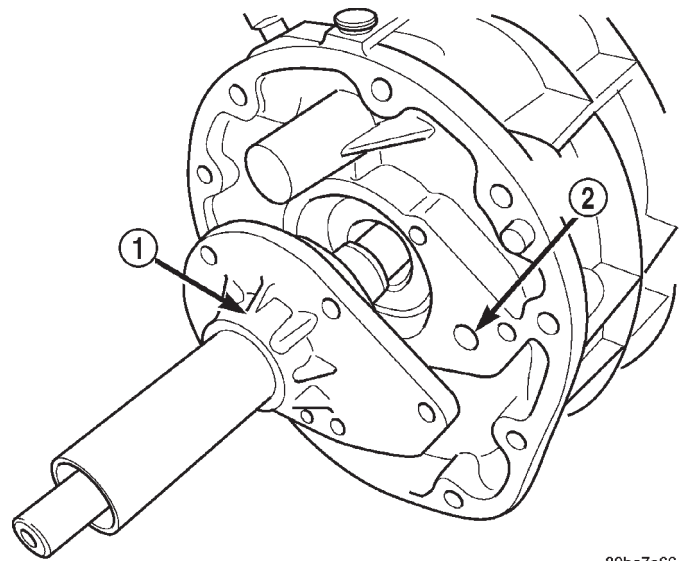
Input Shaft Bearing Retainer Bolt Removal
